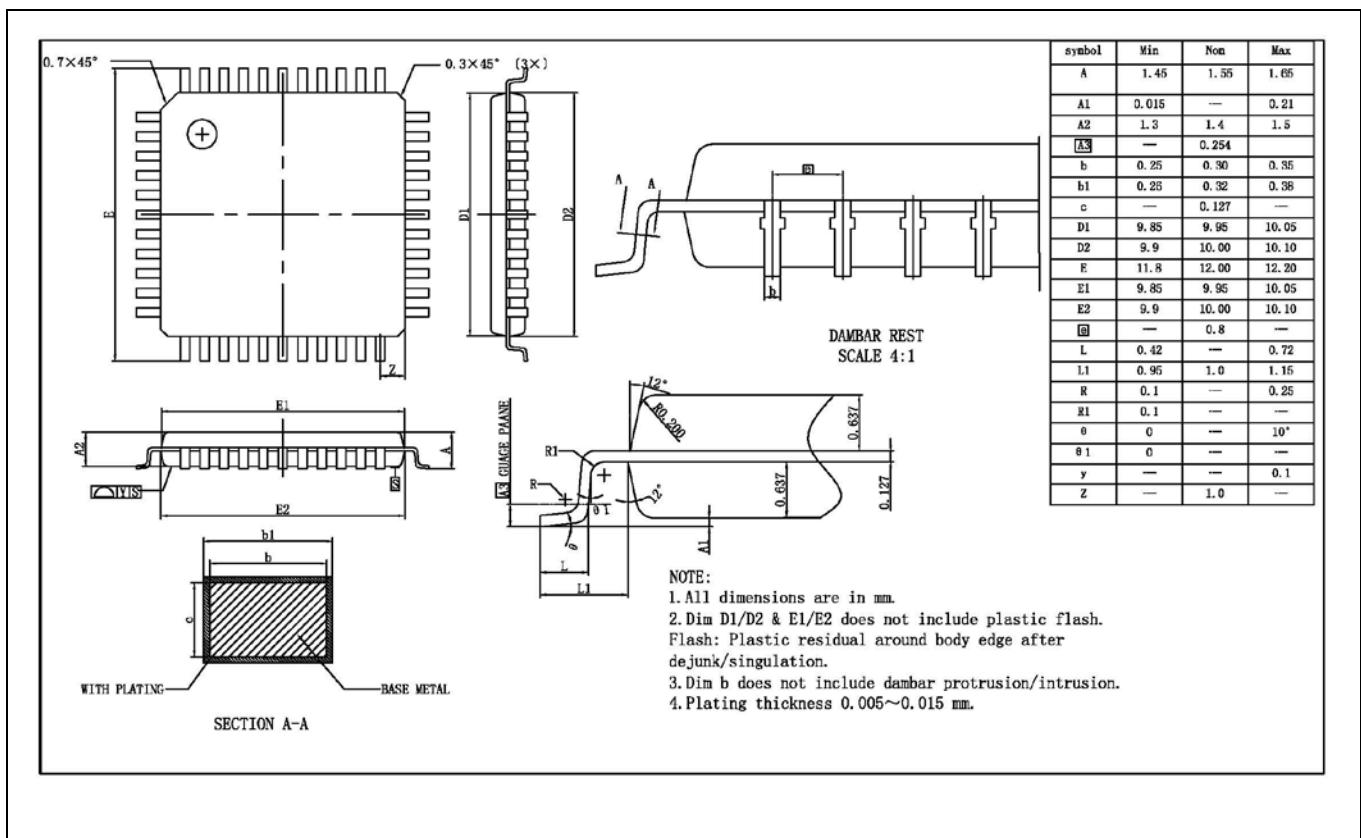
QFP44 (10x10-0.8mm) Package size
